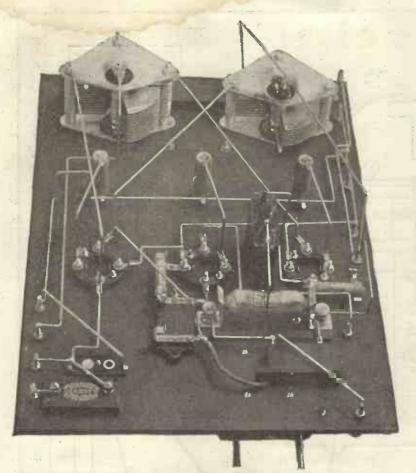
A view of the wiring showing clearly the connection to the valve sockets.
